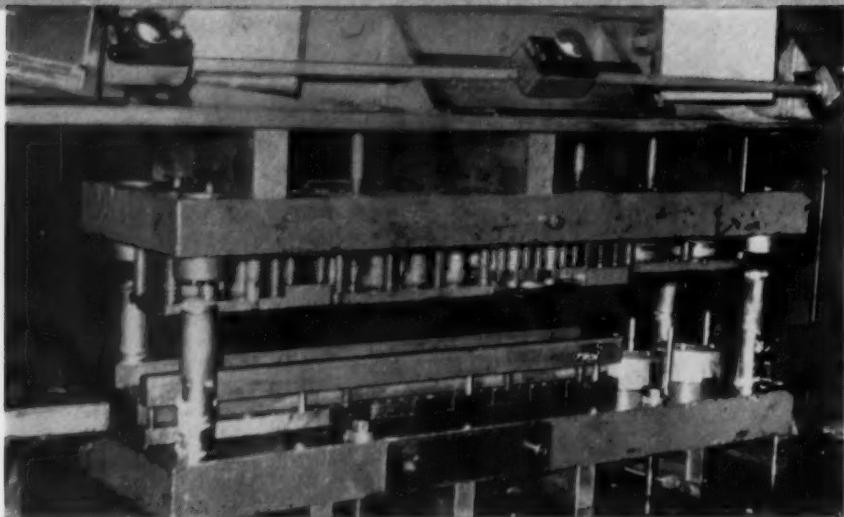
This particular illustration shows the safe operating location of the control buttons used in conjunction with a large progressive die which is installed in a punch press.
